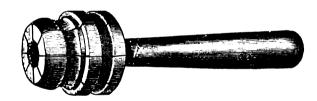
Outside Diam. of Tubes, ins., $1 - 11_4 - 11_2 - 13_4$ $21_4 - 21_2 - 23_4$ GUIDE RING TUBE EXPANDER.
